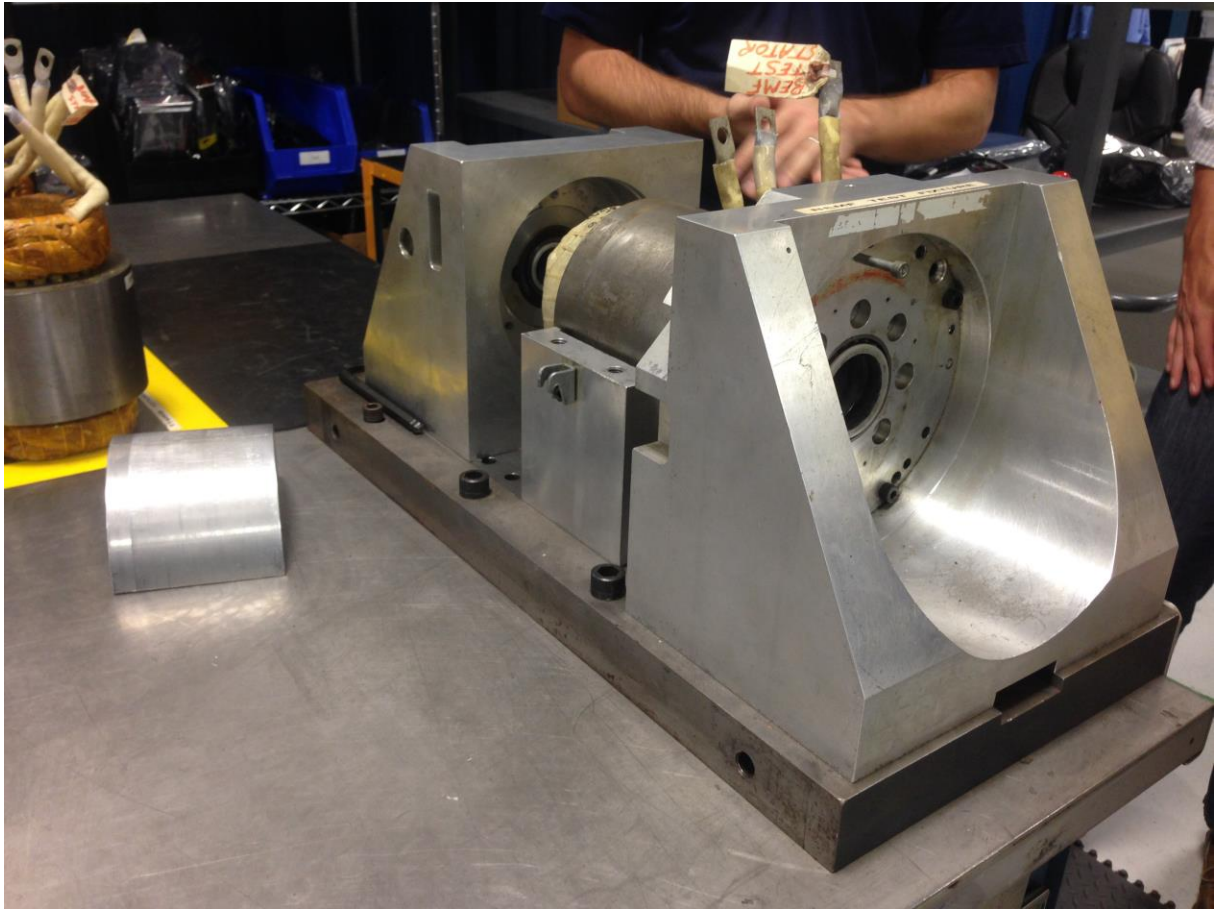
Designed Back EMF Test Fixture for smaller compressor model.^[2]
